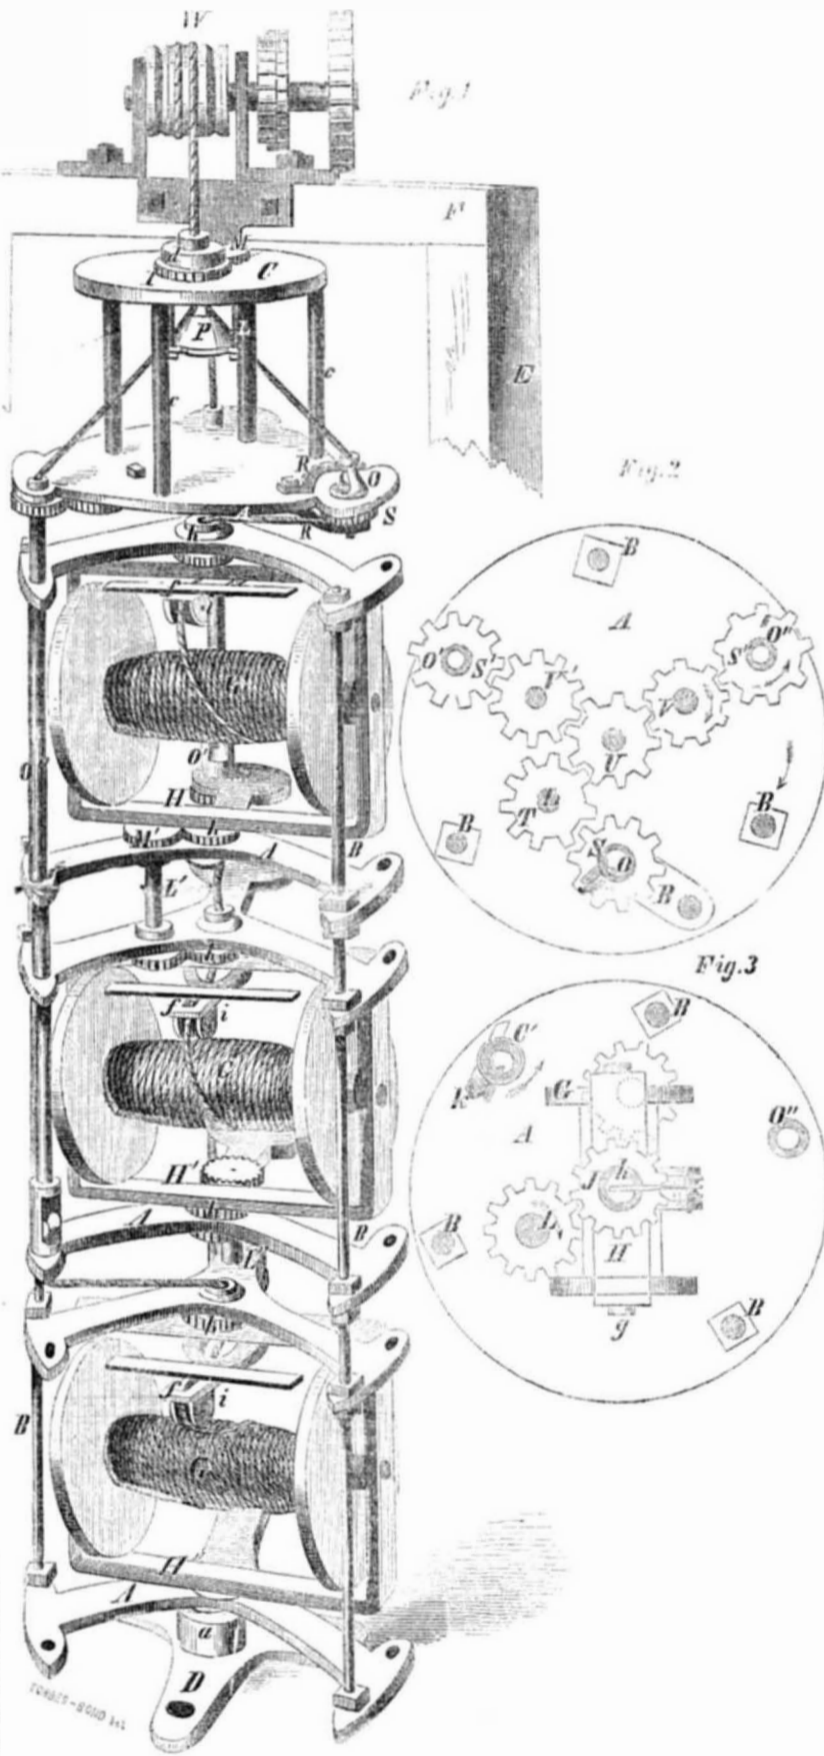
is a perspective view, fig. 2 is a horizontal section, taken under the lower plate of the laying-block, and fig. 3 is a horizontal section taken under the top plate of the upper strand spindle. Similar letters indicate like parts on all the figures.
